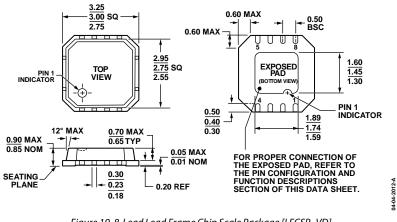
8-Lead Lead Frame Chip Scale Package [LFCSP\_VD] 3 mm × 3 mm Body, Very Thin, Dual Lead (CP-8-2) Dimensions shown in millimeters
